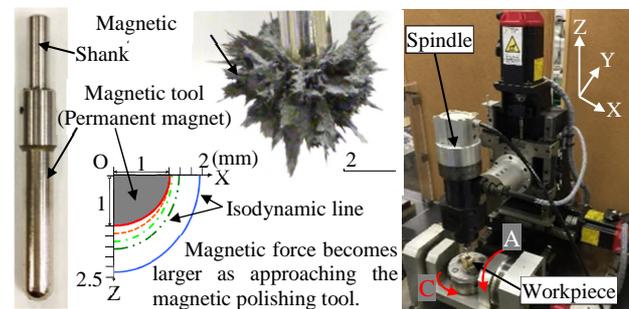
Magnetic polishing tool and paste and 5-axis machining center.
